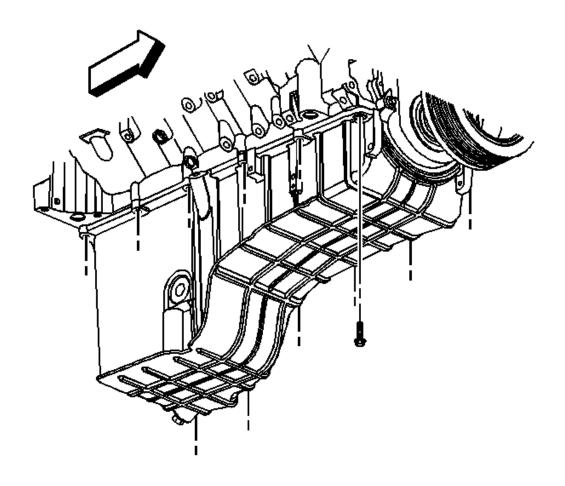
View Of Battery Cable Channel Bolt Courtesy of GENERAL MOTORS CORP.
